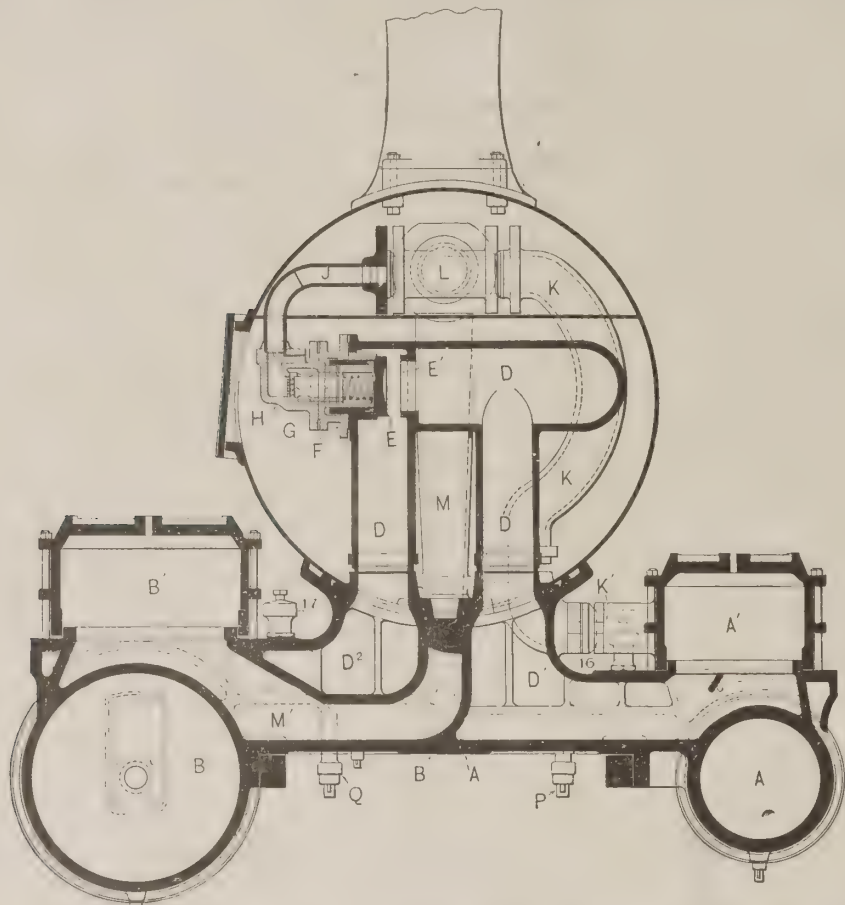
SECTIONAL VIEW THROUGH SMOKEBOX AND CYLINDER CASTINGS.
